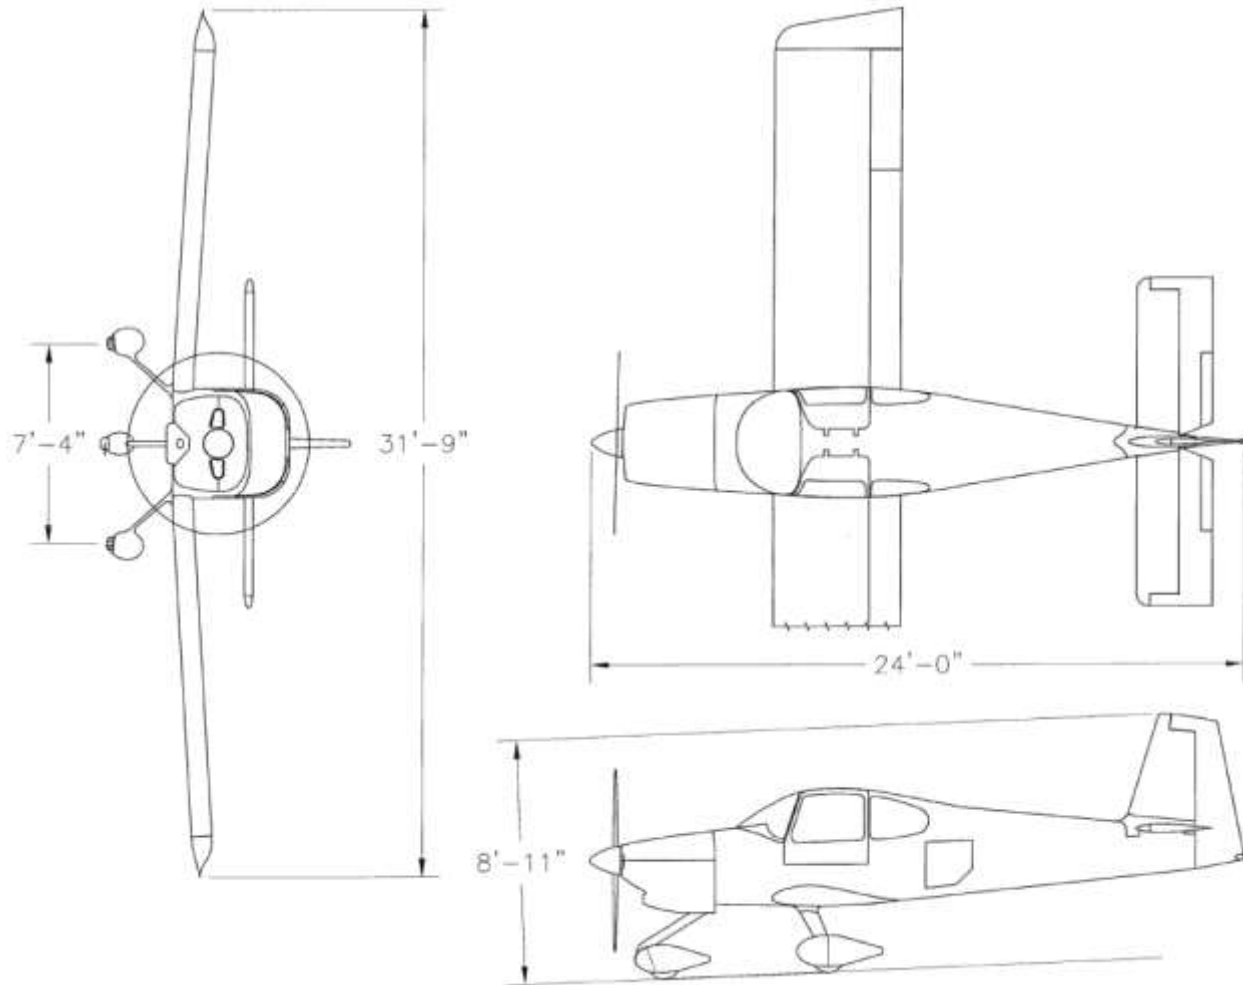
Three view dimensioned drawing of a Vans RV-10 aircraft
